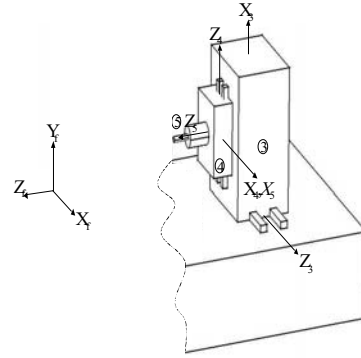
Coordinate systems of spindle on a 5-axes CNC machining center
